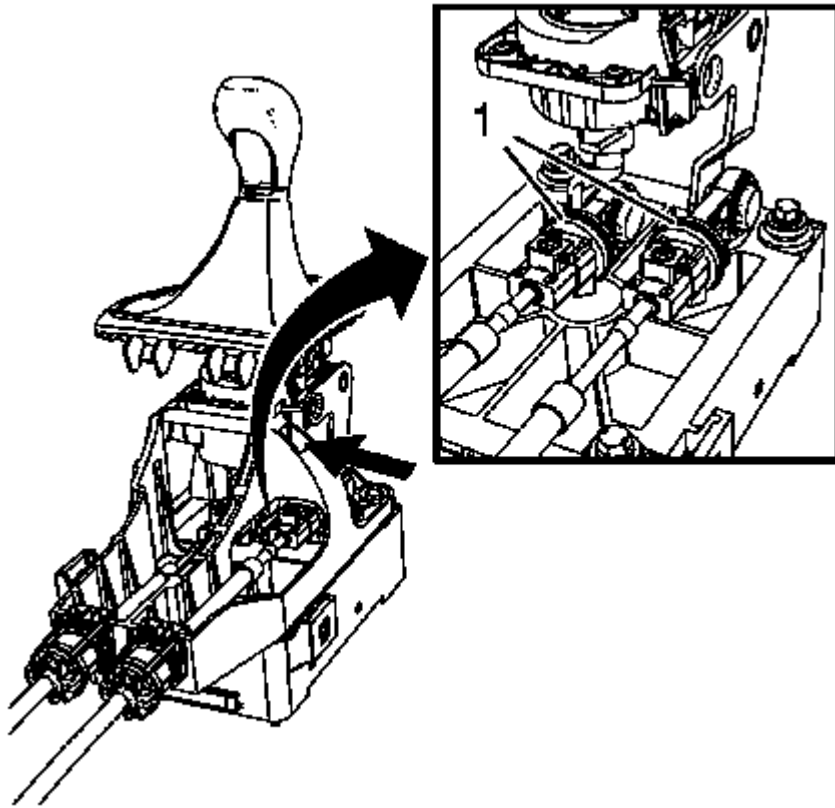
Shift Lever And Selector Lever Cable Adjust Locks
